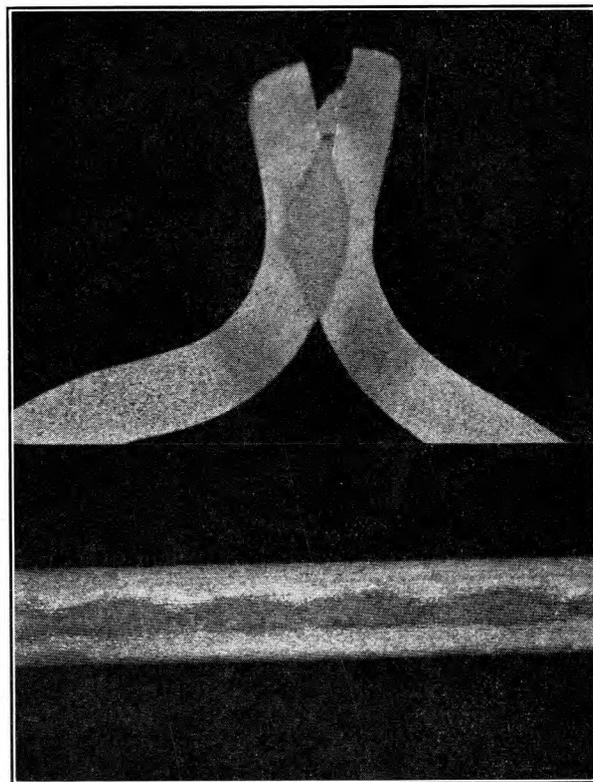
PHOTOMICROGRAPHS OF WELDED SEAM (MAGNIFICATION X11).
